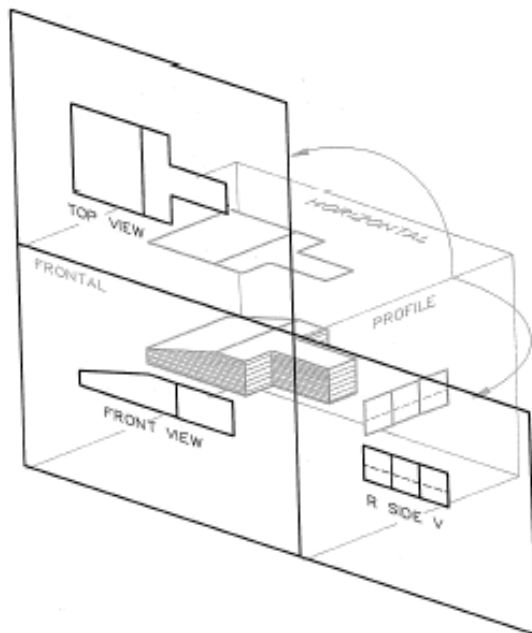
Three-view drawings are commonly used for describing small machine parts. The glass box is used to illustrate how the views are projected onto their projection planes.
